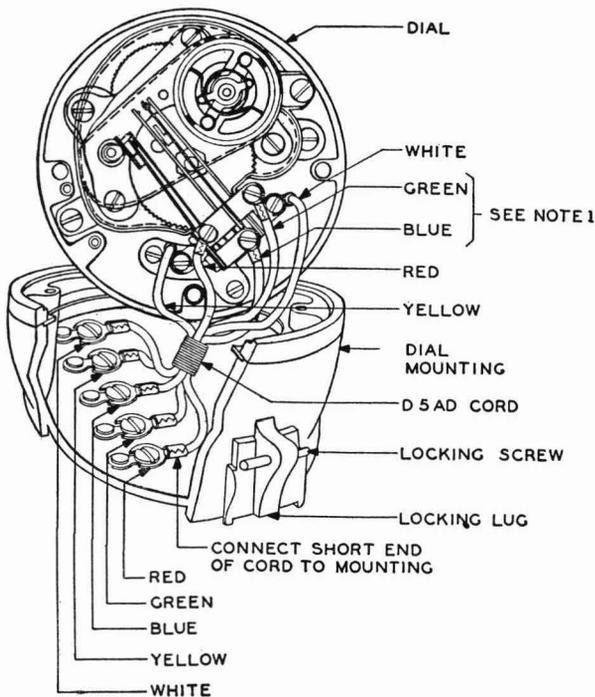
Method of Cording Dial Mountings and Dial, Using D5AD Cord (Dial Having a W Terminal as a Part of the Contact Spring Assembly)
